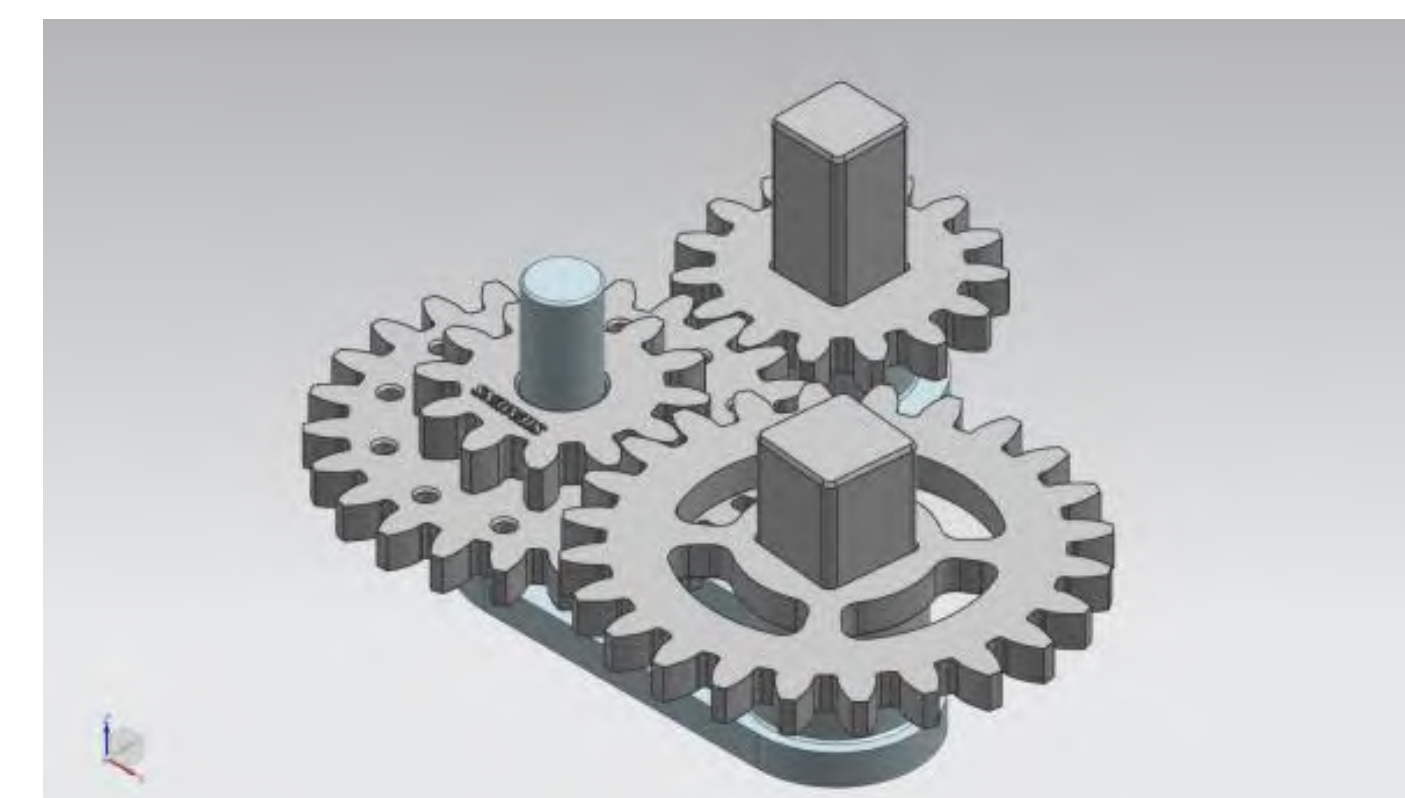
The desired end configuration of the Siemens assembly challenge. Credits: Siemens Corporate Technology.
